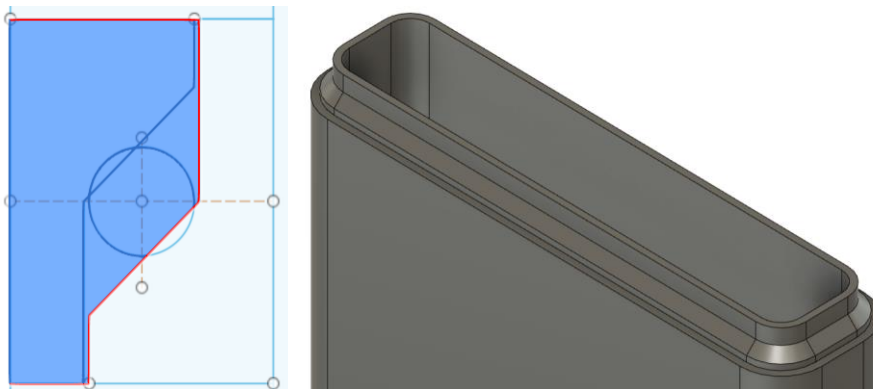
Profile sketch and sweep cut for bottom side in Fusion 360
